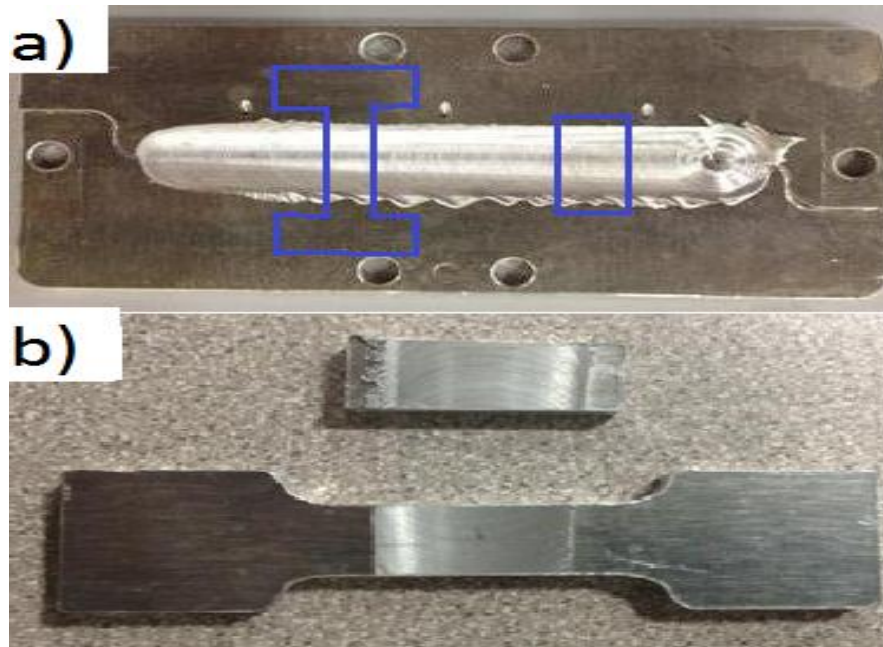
(a) Welded sample (b) Specimens taken for tensile and microscopic testing
